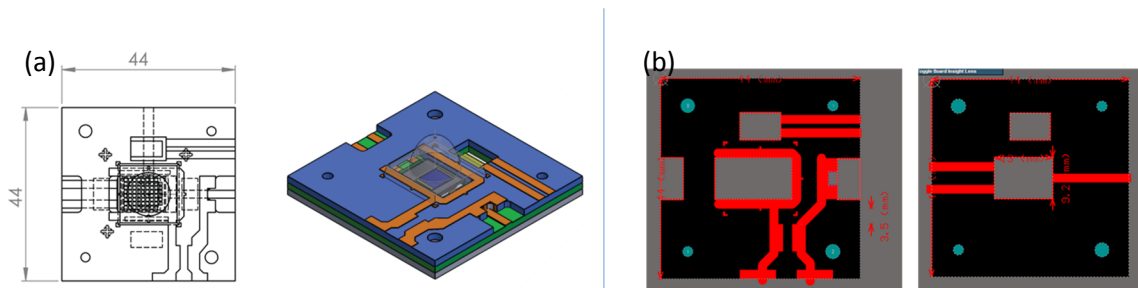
Detailed Designs of a GEN VII Receiver (a) Solidworks Design, (b) Altium Design
